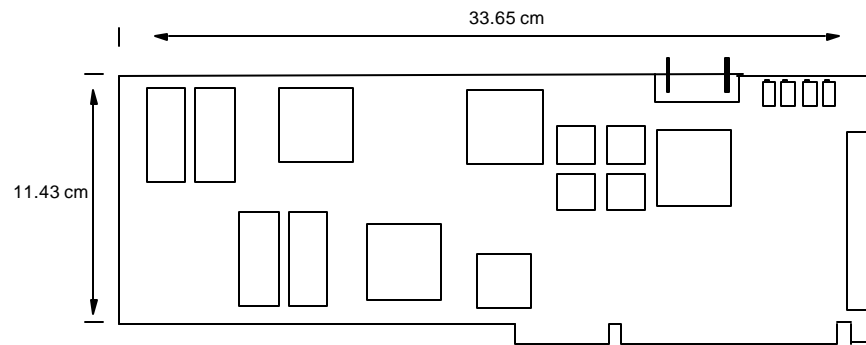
PC/AT Mx4 cnC++ Mechanical Dimensions
